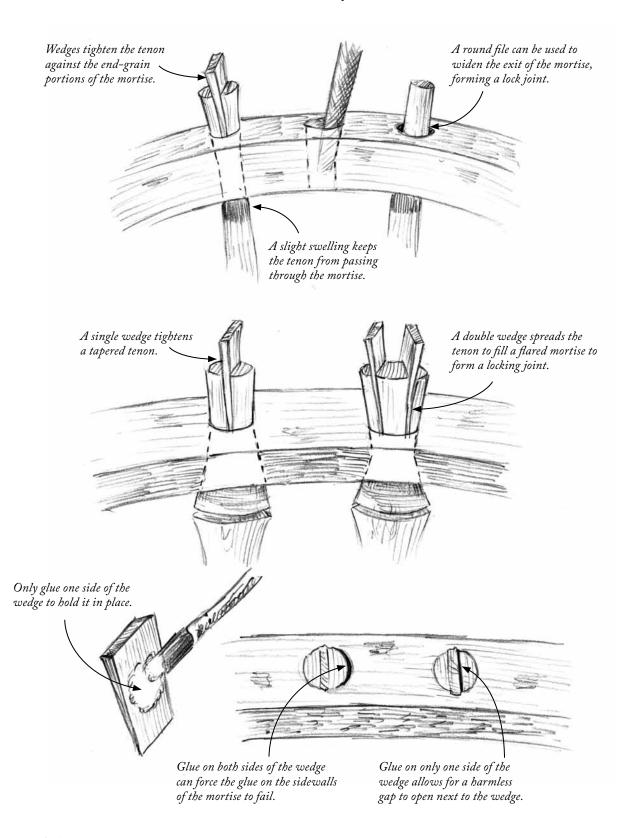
Wedging makes for a tighter joint than you could hope to fit together.
